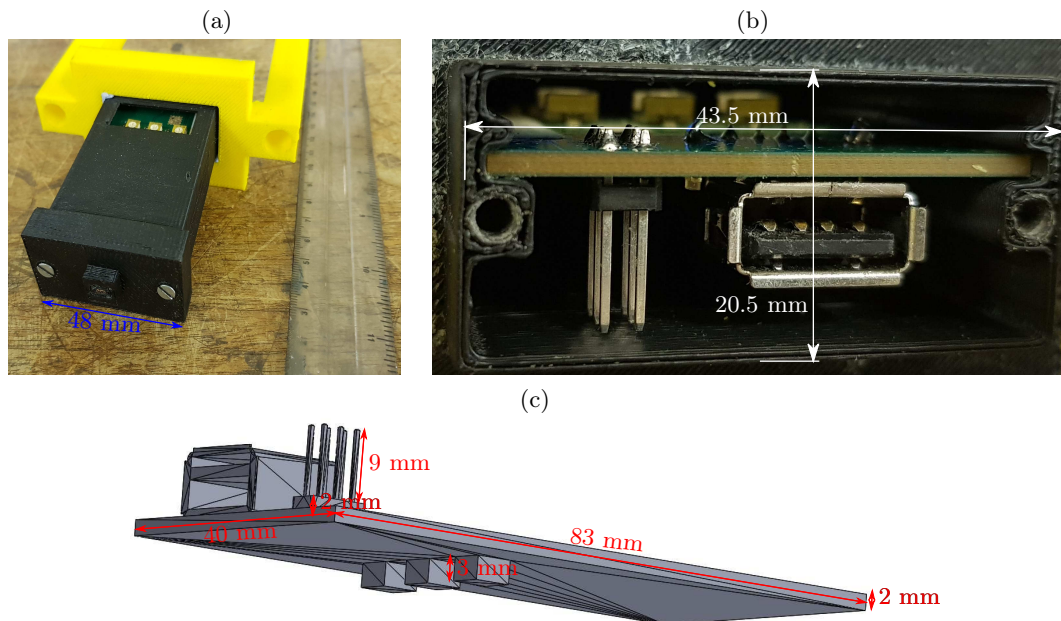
(a) and (b) are images of the EddySense integrated circuit board enclosed in a 3D printed holder. There is a ruler for reference in (a). (c) is an image of a computer-aided design (CAD) model that shows the geometry of the printed circuit board. The overall dimensions are 83 mm  $\times$  40 mm  $\times$  16 mm).
